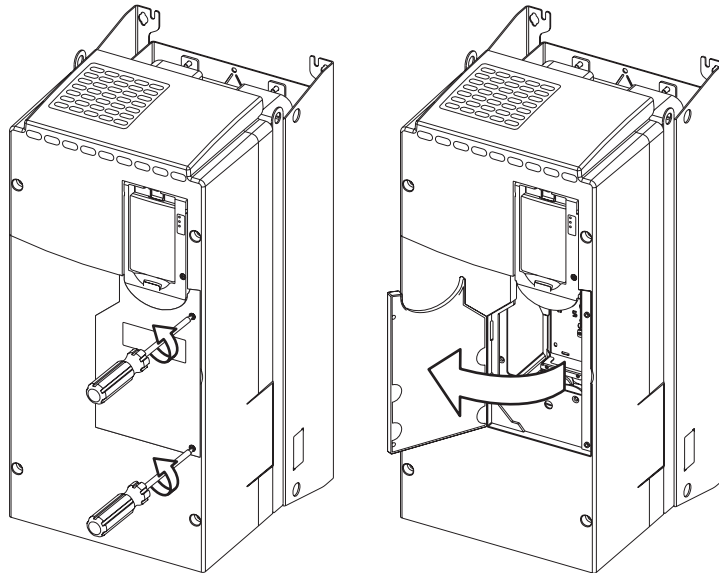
IP00, NEMA/UL Open Type, Frames 6 & 7
